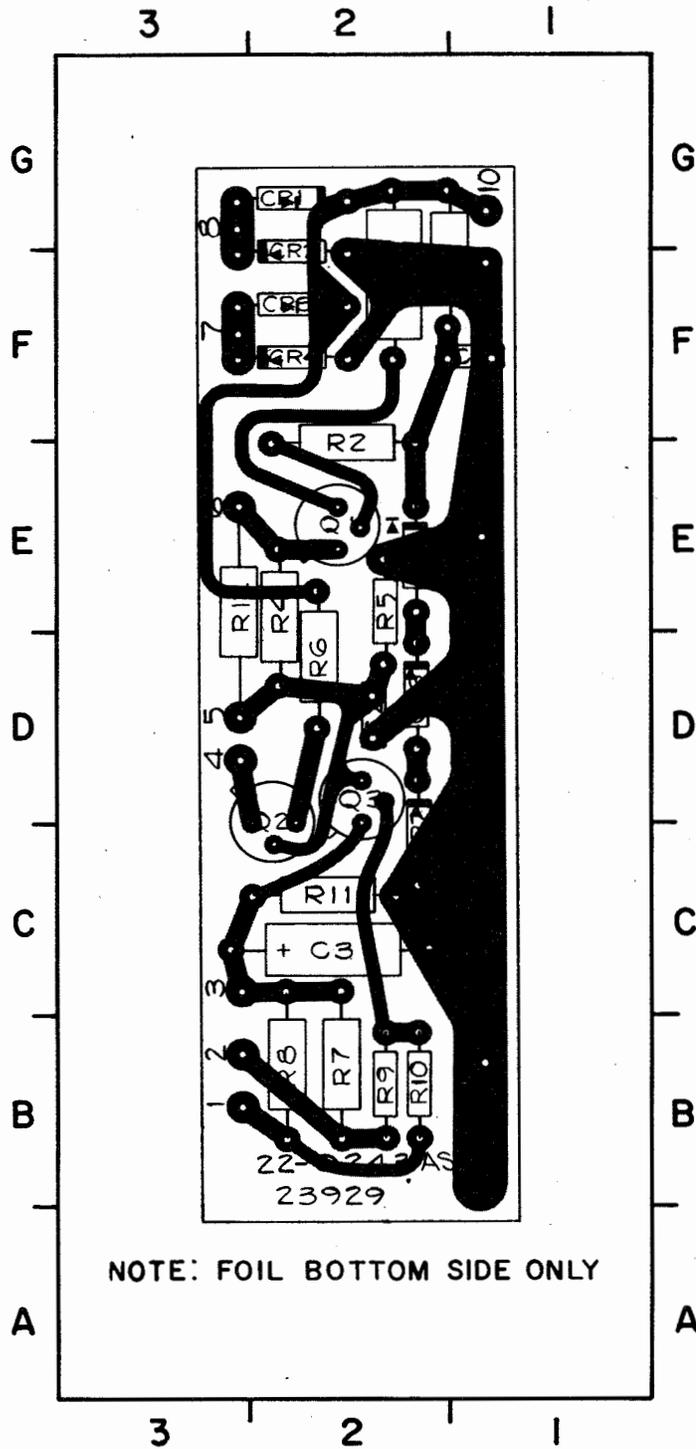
Regulator Assembly, 1A3A1, Parts Location
